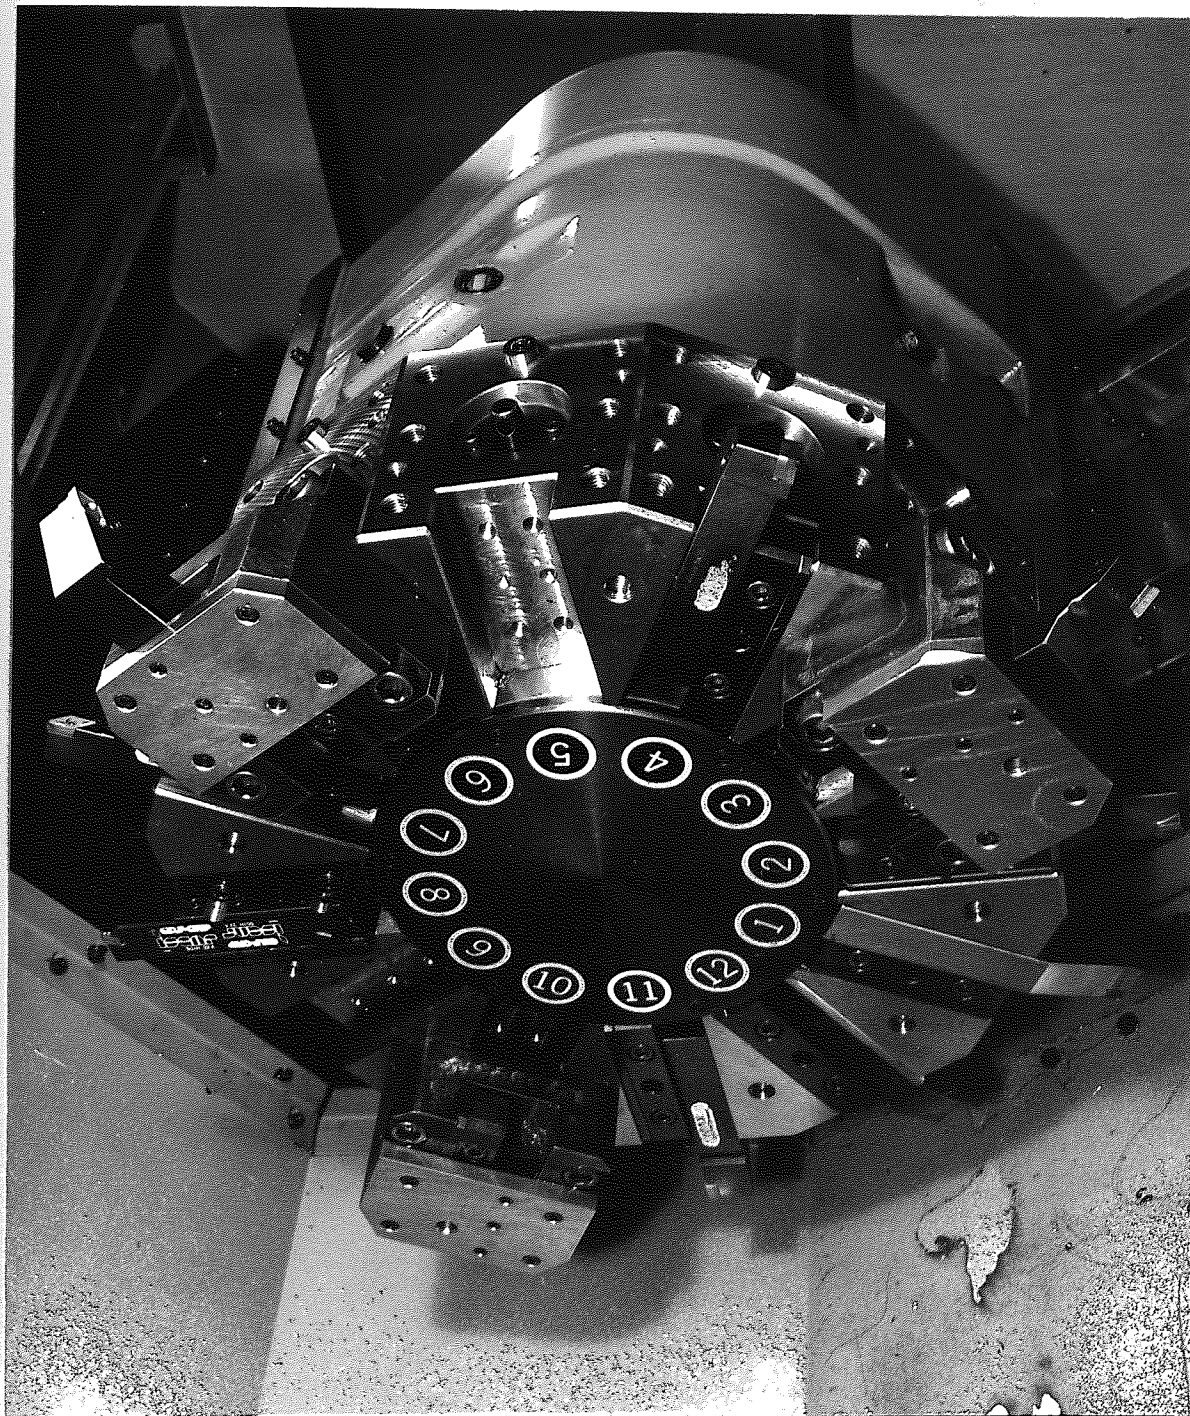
TOOLING SETUP IN THE TURRET OF THE CNC LATHE
